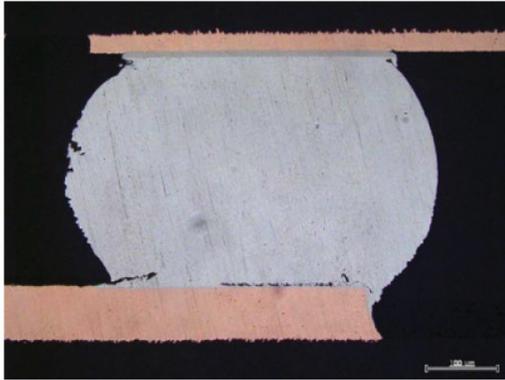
SAC305 corner BGA Control sample (no coating) showing cracking along bottom pad.
